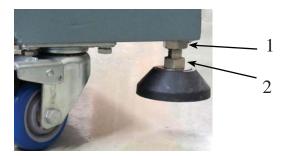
Sealing Machine Leveling/Height Adjustment
